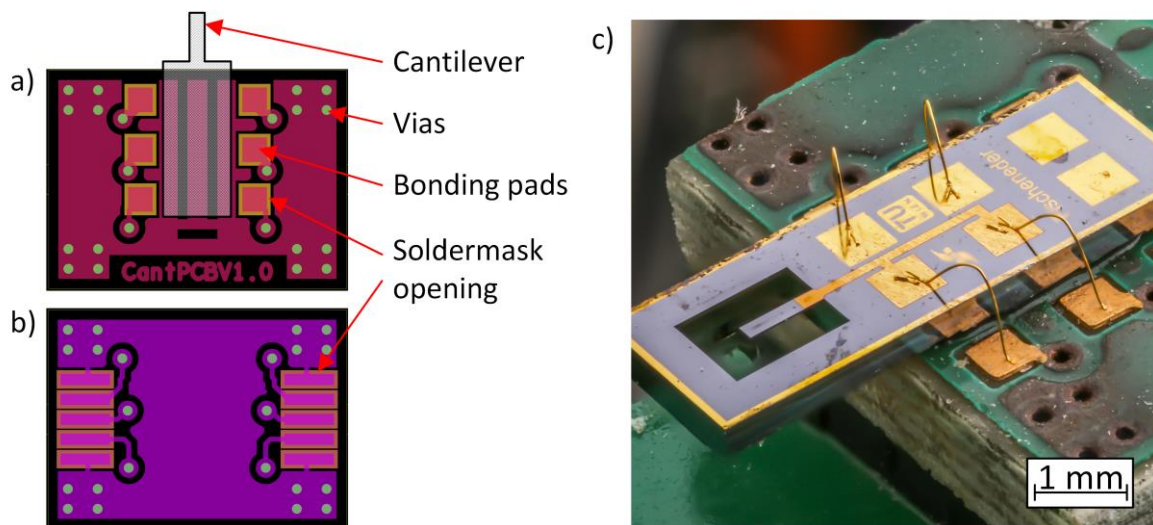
The layout of cantilever PCB (a) shows the corresponding top view with a cantilever placed schematically. The connector for the electrical and mechanical connections are placed on the bottom side of the PCB (b). (c) shows an optical photograph of the cantilever mechanically and electrically mounted onto the PCB.
